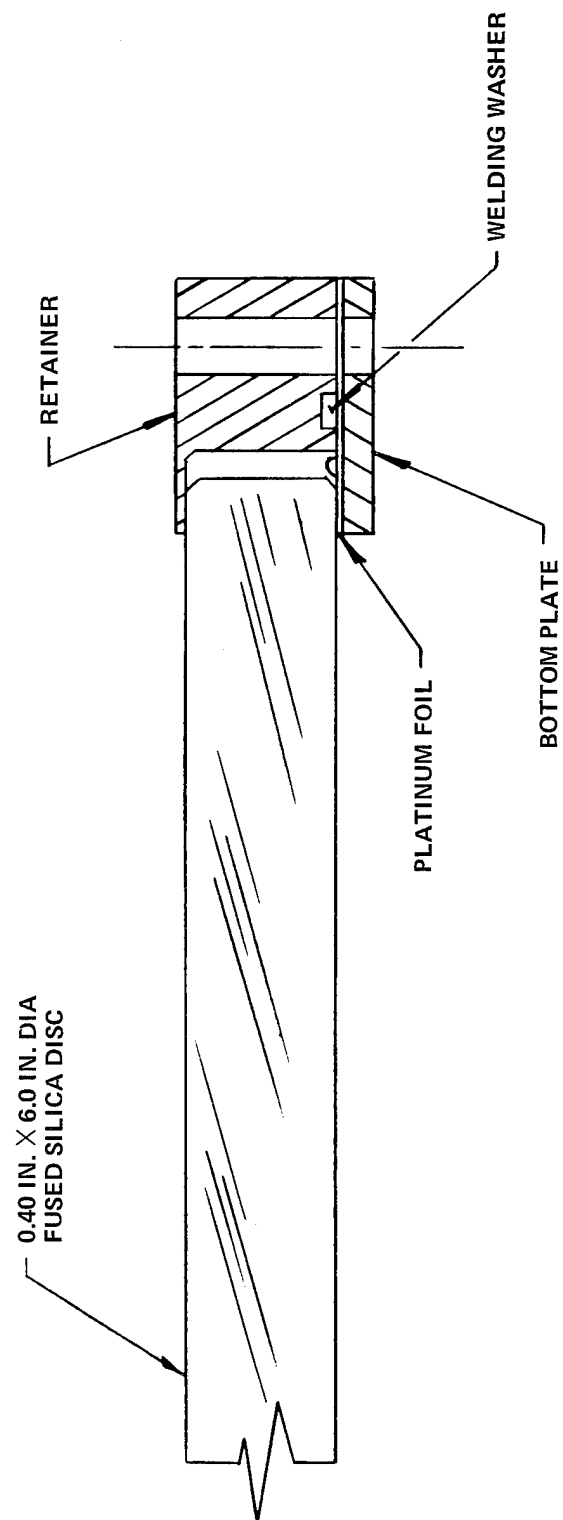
Platinum/Fused Silica Glazing Assembly
